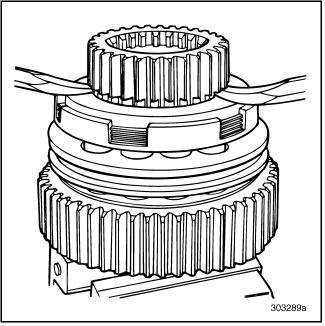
Removing Hi-Range/Hi-Split Gear and Ball Bearing (T313L/T318L Shown)
